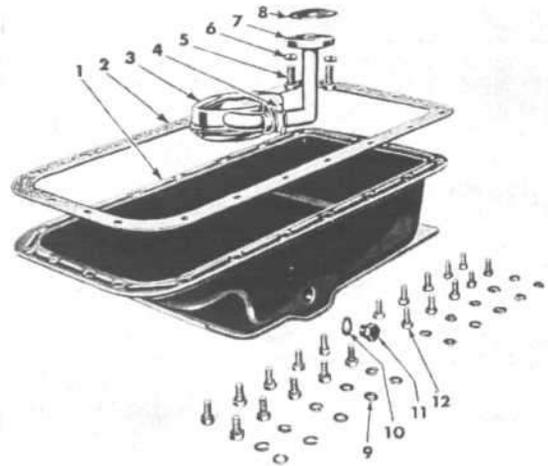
FLOATING OIL INTAKE AND OIL PAN 124, No. 7, is flat. Clean both the flange and the crankcase surfaces thoroughly before installing a new gasket. Be sure the retaining screws are tight. The oil pan screw torque wrench reading is 9 to 14 lb-ft. [1,24 a 1,94 kg-m.].
